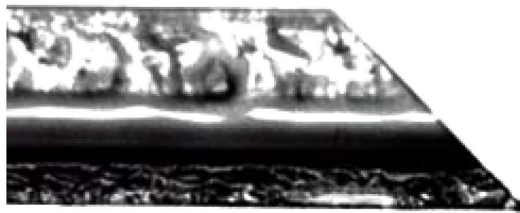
The fabrication result to manufacture 45° tilted mirror surface.
